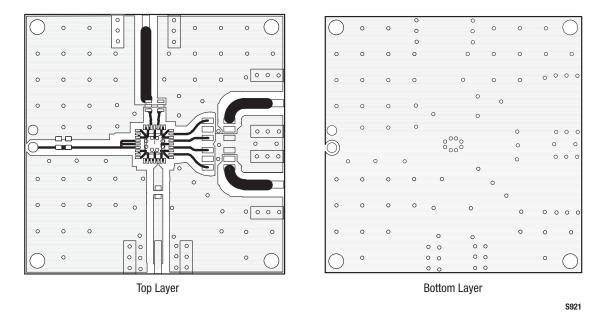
SKY73012 Evaluation Board Assembly Diagram (1800 to 3900 MHz) (Top View)
